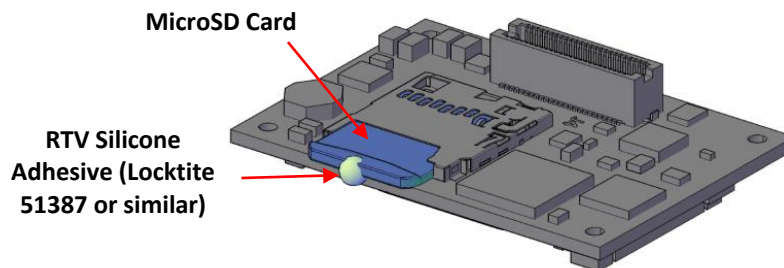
Example - 1500-OEM (Rev E) Adhesive Placement on MicroSD Card
